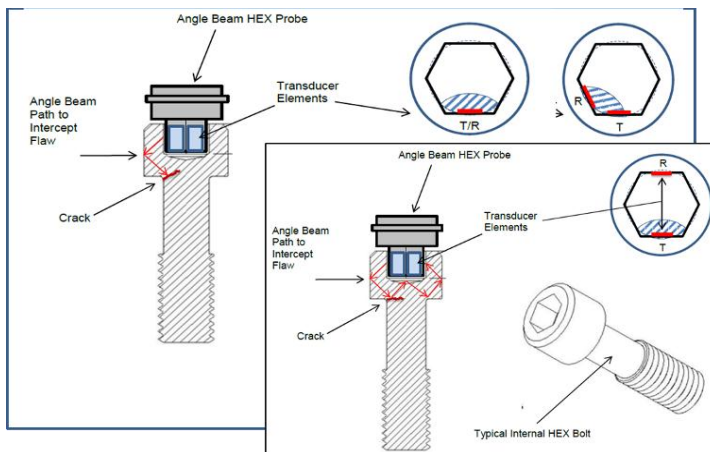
ID hex socket inspection from a single face, adjacent, and opposing socket faces detect all target flaws near head.
